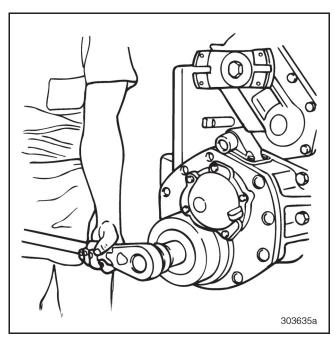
Removing Front-Driving Shaft Yoke Clamp Plate Capscrew
